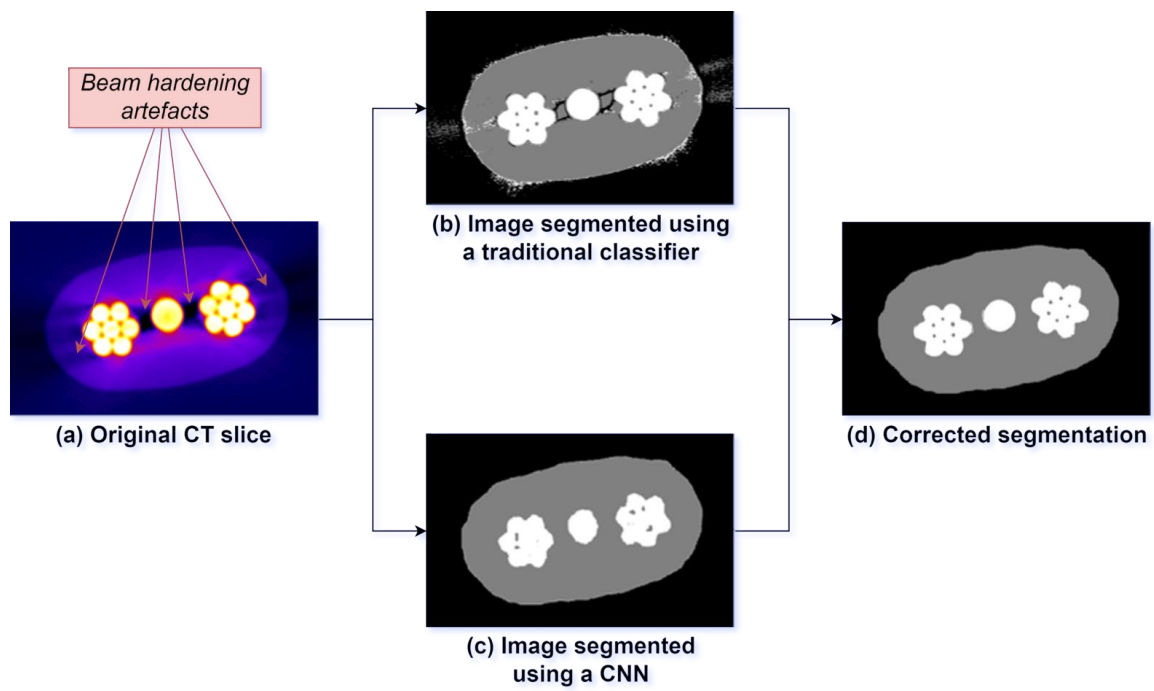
Example of CT slice of a section of electric cable segmented using our method
